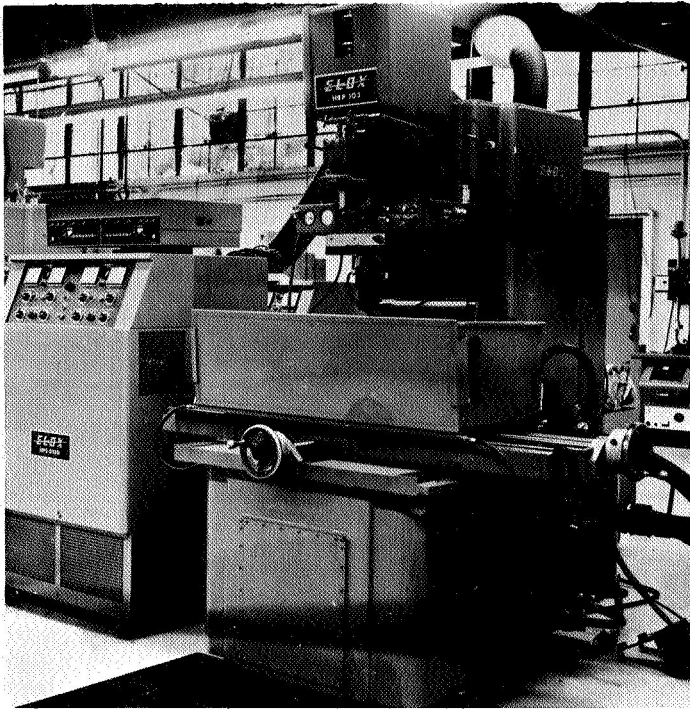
TYPICAL ELECTRICAL-DISCHARGE-MACHINING INSTALLATION (REF. 115)
